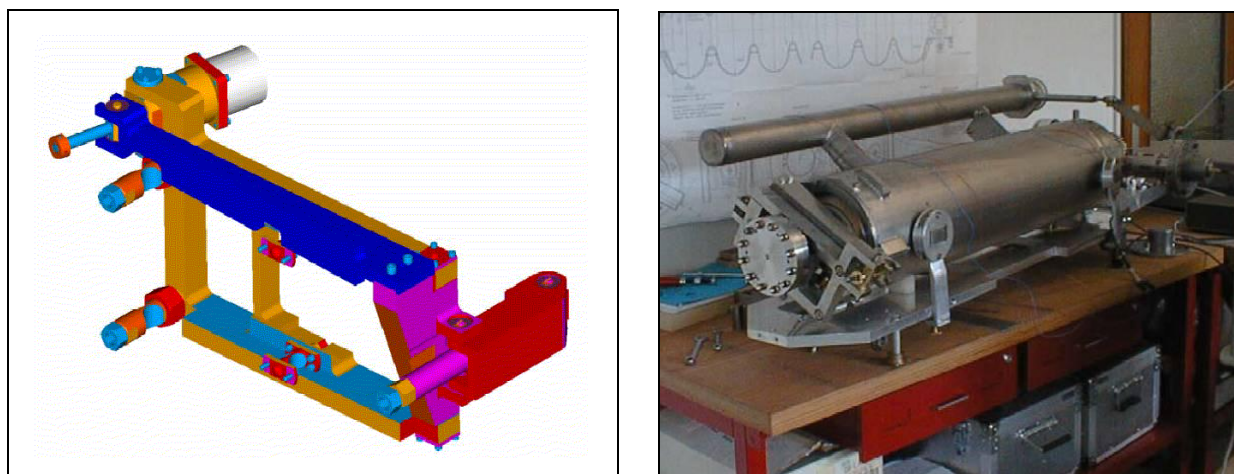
SNS Cavity Tuner (left) and TESLA Cavity/Tank/Tuner assembly (right). The TESLA tuner incorporates both slow (stepping motor) mechanical tuners and fast (piezoelectric) tuners in a single assembly.
